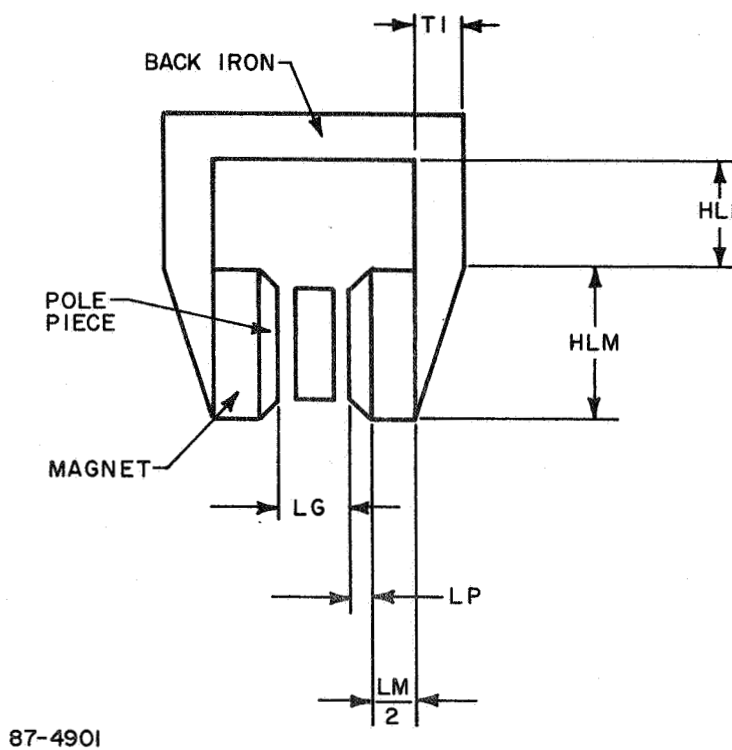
MAGNET ASSEMBLY CROSS SECTION
